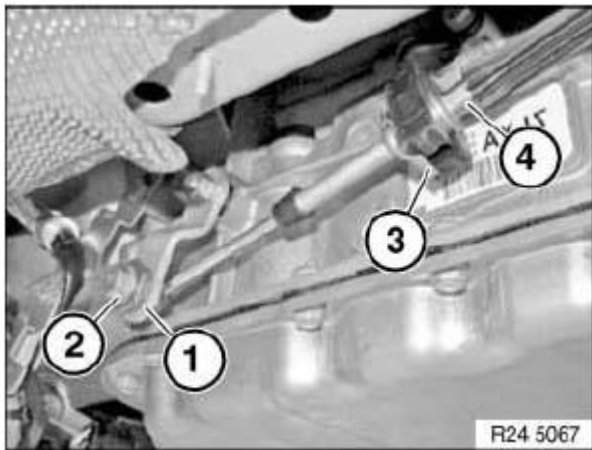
Identifying Clamping Sleeve, Retainer And Nut
